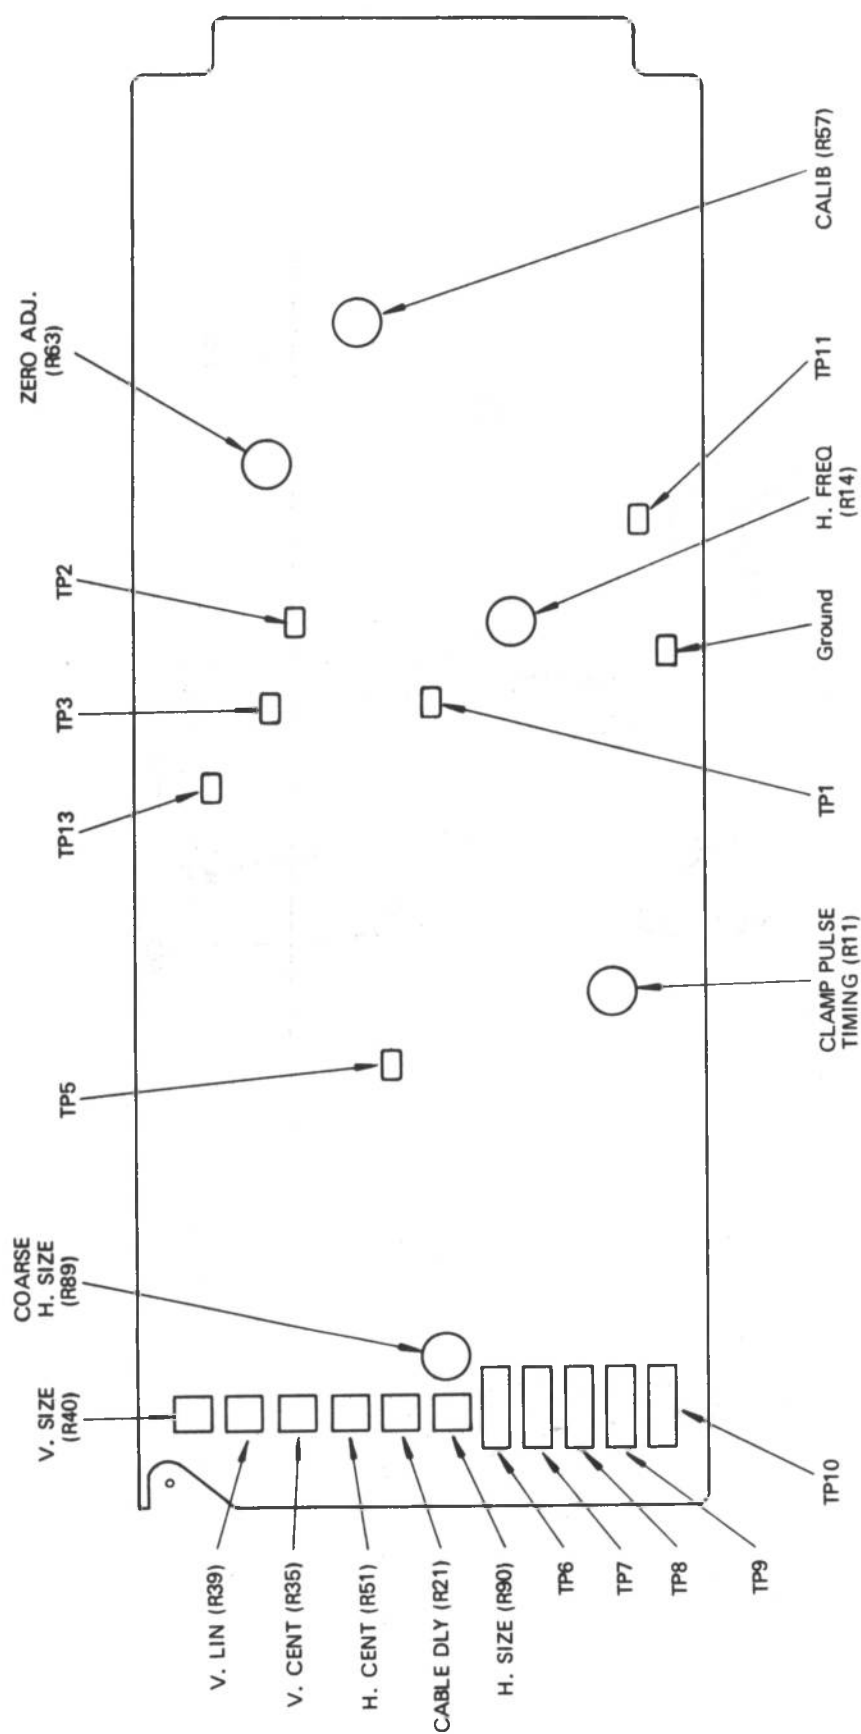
Deflection Board 8455901 Test Points and Adjustable Controls (S/N 9-0001 and ON)
